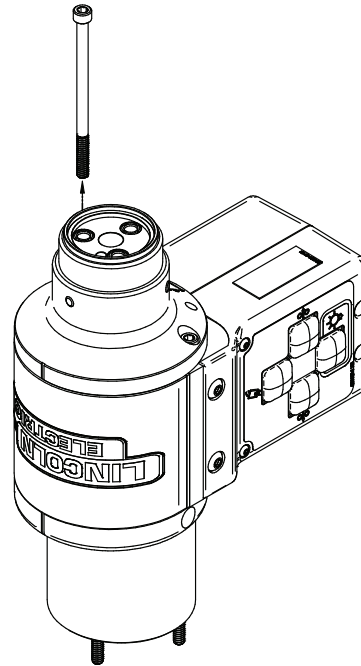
Pull Feeder assembly as it comes shipped
